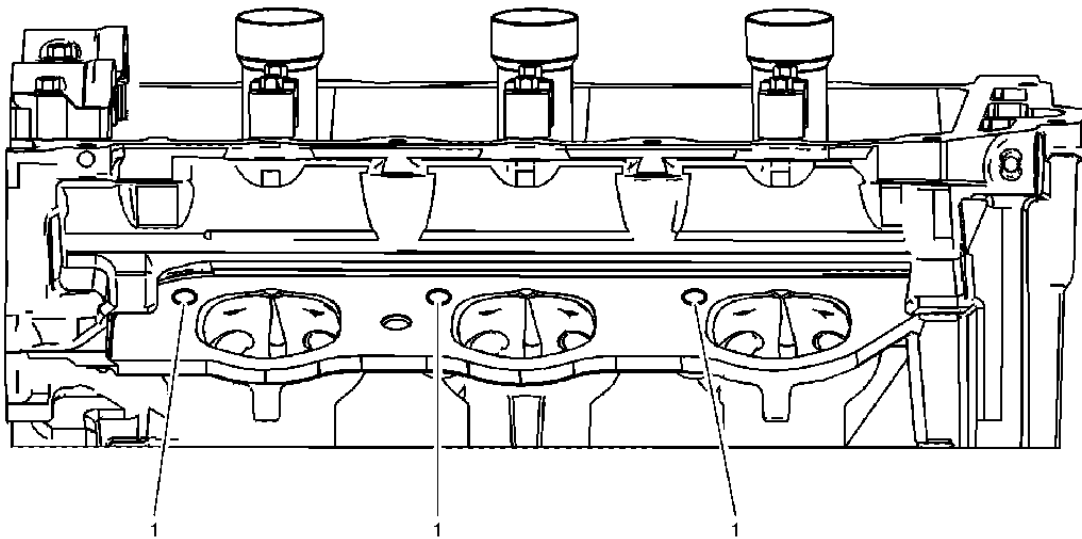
Identifying Right Cylinder Head Front Face
